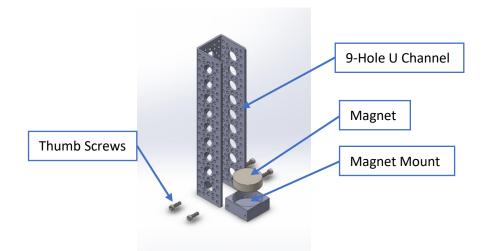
9-Hole pillar assembly. A combination of a U-channel, magnet, thumb screws, and magnet mount block
